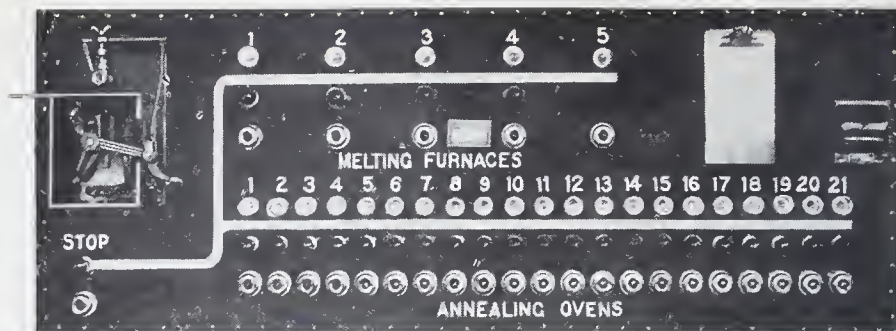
GRINDLE PNEUMATIC FUEL CONVEYING SIGNAL BOARD.
